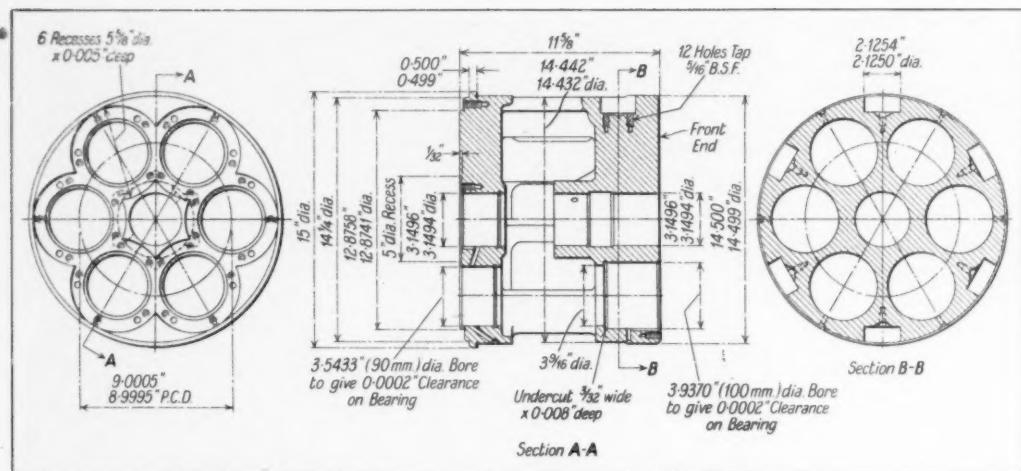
Drum and Spindle Assembly for a Wickman 1½-in. Capacity, 5-spindle Bar Automatic
